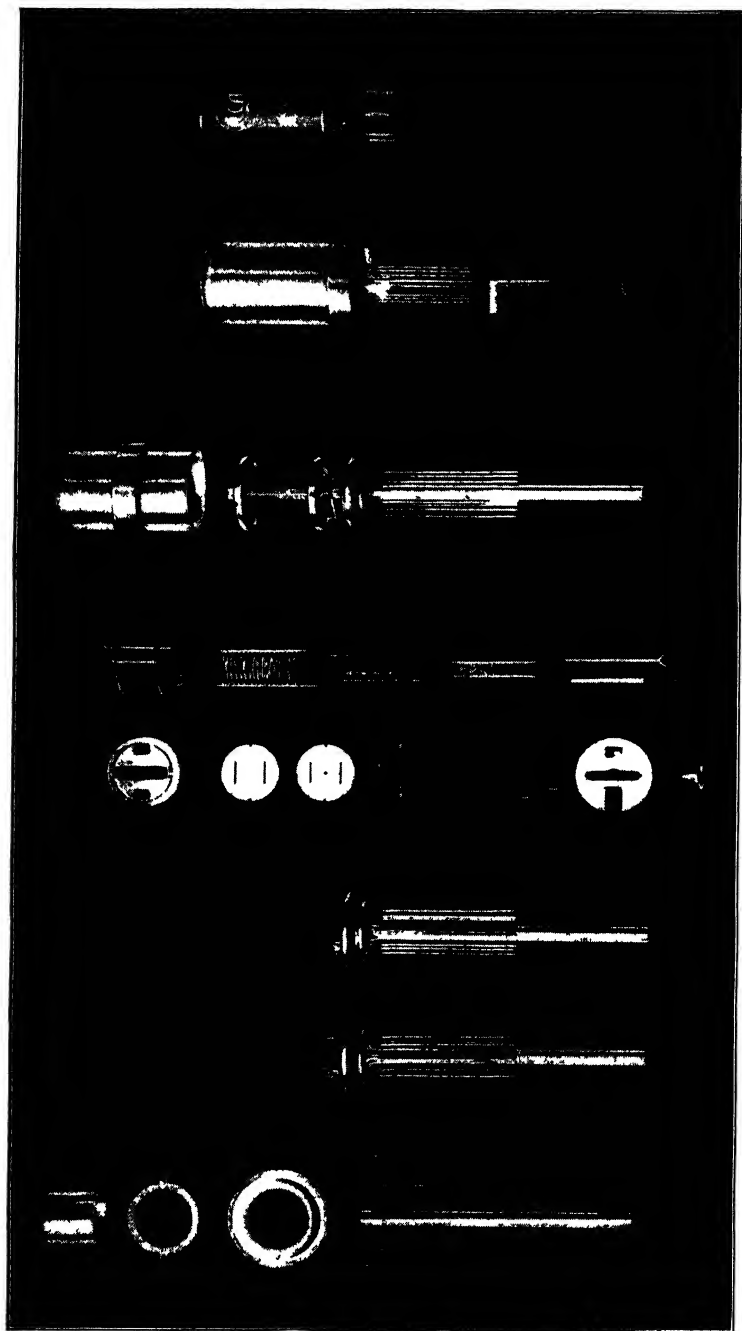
Parts and assembly of a metal receiving tube. (Courtesy Radio Corporation of America)
